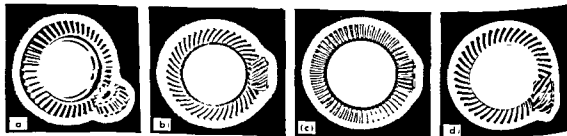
Examples of bevel gears with pinions. (a) Straight. (b) Spiral. (c) Zerol. (d) Hypoid. (Gleason Works)
